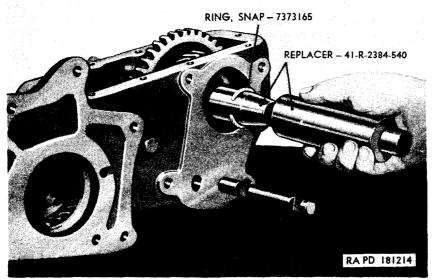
Installing thrust washer snap ring on transfer rear axle output shaft.
